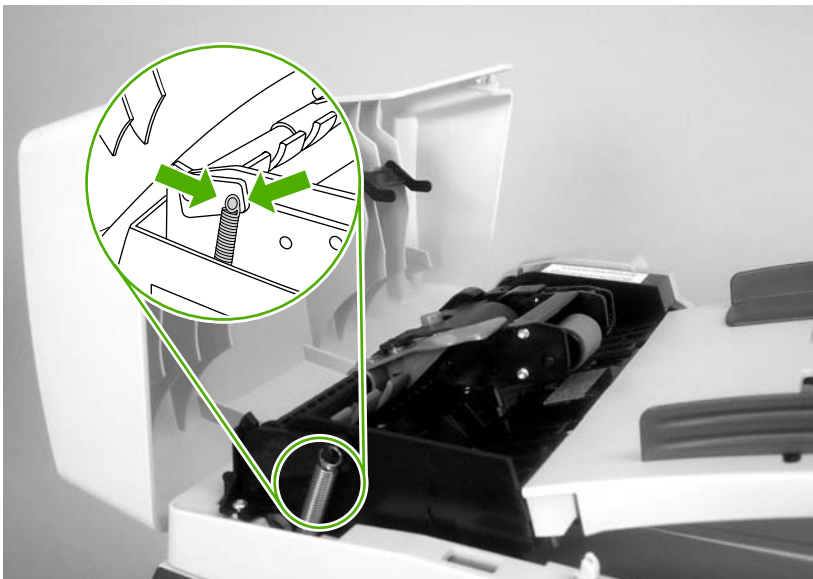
Replacing the ADF pickup-roller assembly (6 of 6)
